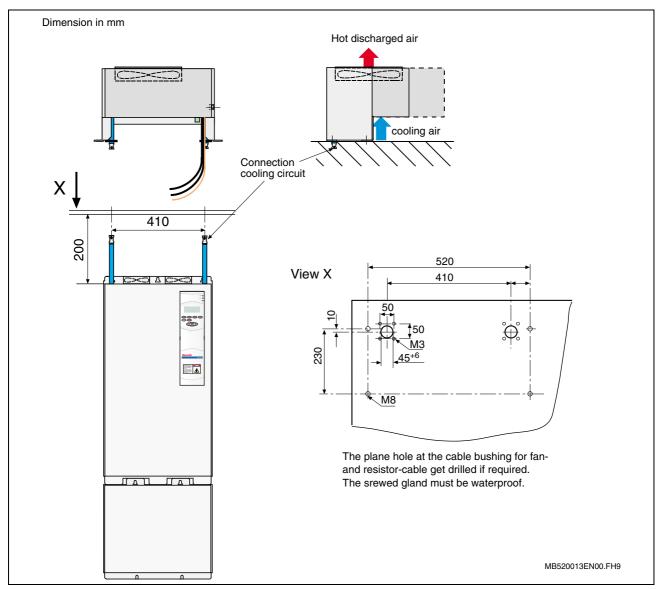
Dimension sheet for cabinet roof mounting, size class G
